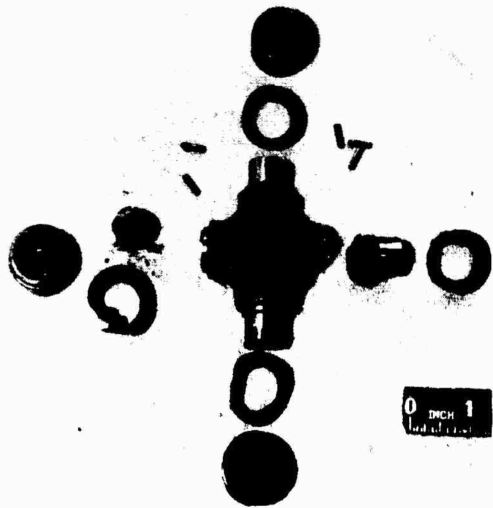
Broken Left Rear-Wheel Drive-Shaft Outboard Universal-Joint Cross On M151A1C after 4189 Test Miles.
